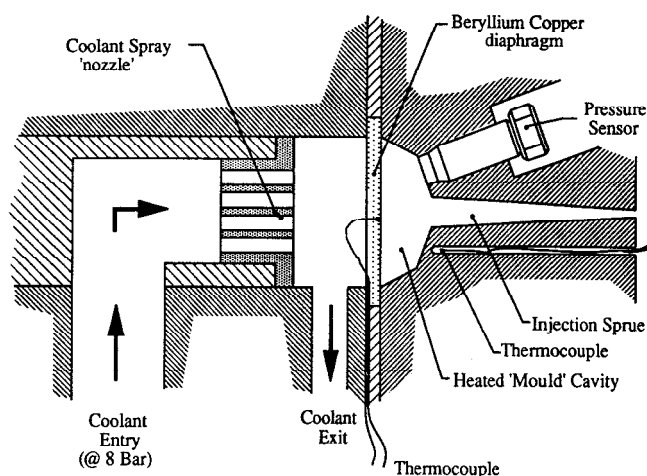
Apparatus for solidification under pressure fitted to the modified injection molding machine
